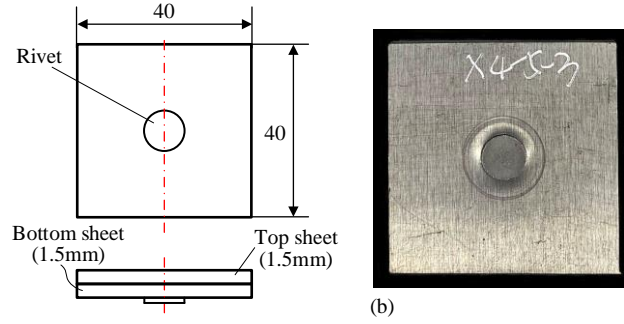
Specimens dimensions of the SPR joints (in mm)
